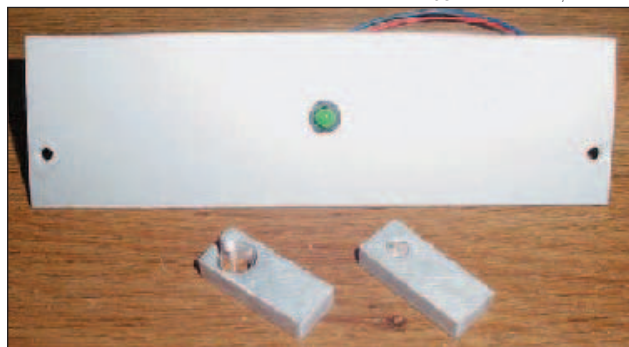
Using this tool makes for a simple installation that avoids damage to your equipment's faceplate.
